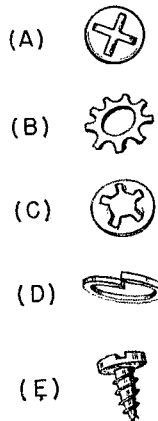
(A) Phillips-type screw head. (B) External-tooth lock washer. (C) Internal-tooth lock washer. (D) Spring or split-type lock washer. (E) Sheet-metal screw.
